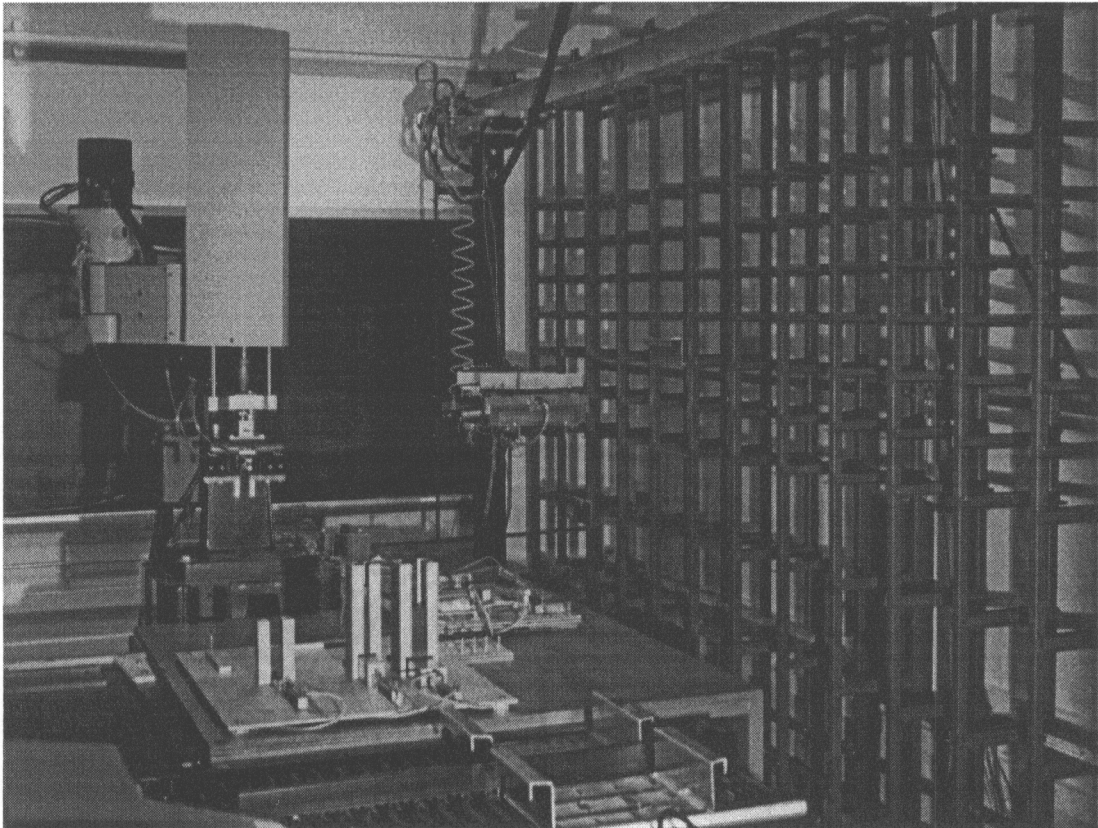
View of AS/RS with robot, assembly table, and conveyor.
